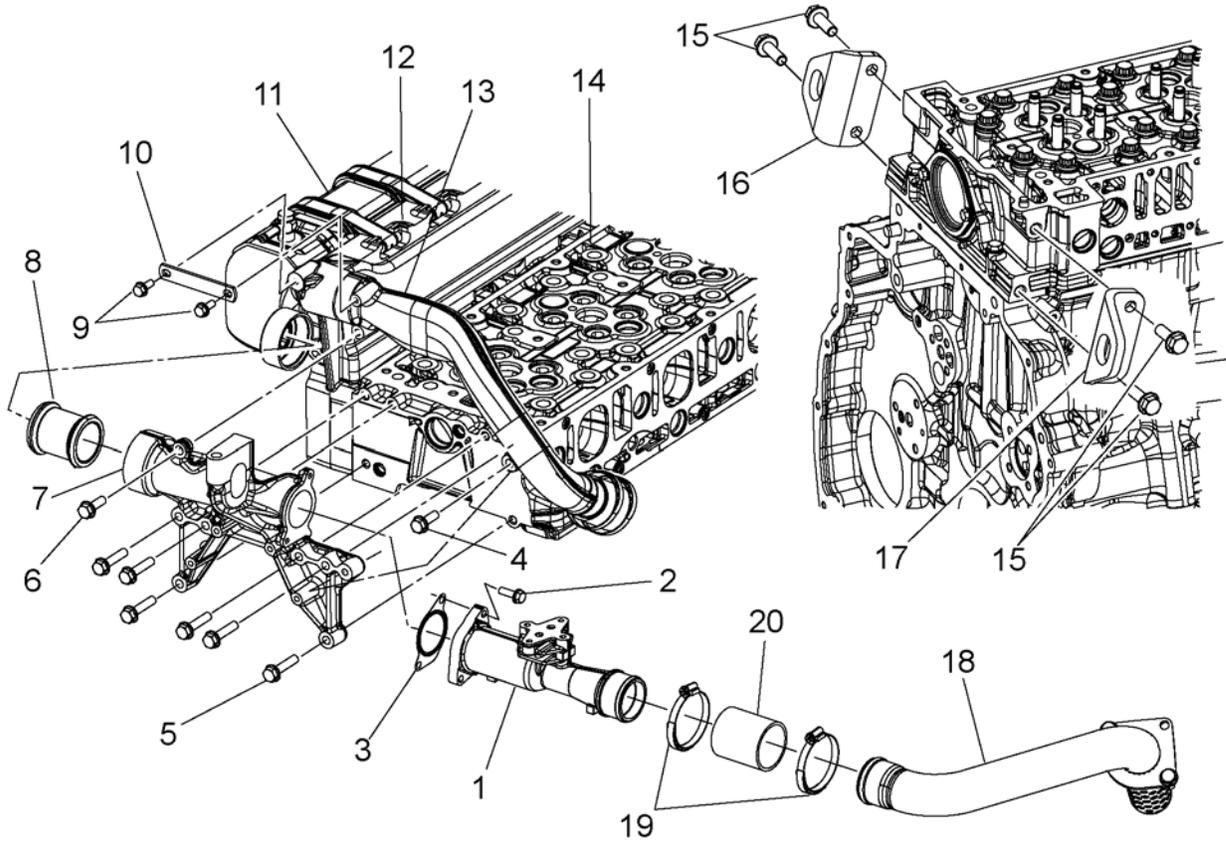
DD13 EPA07 Lifting Bracket Locations
